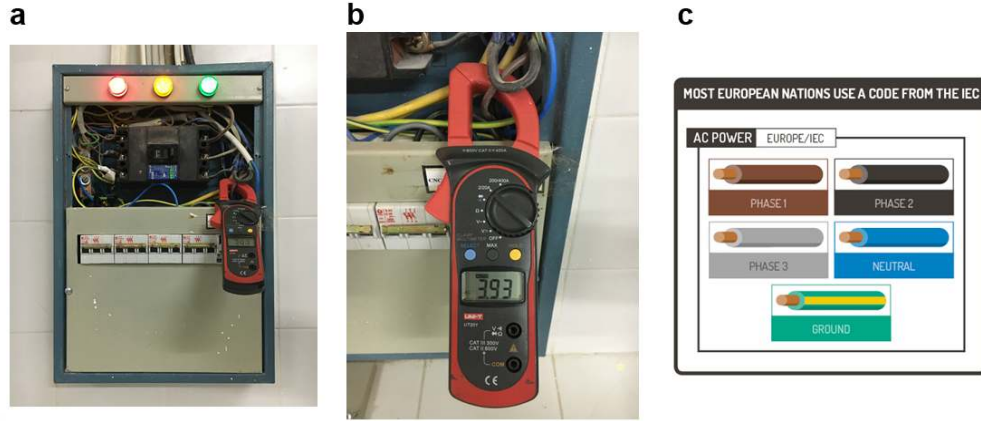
Setup for current measurement used in this work; a) Electric panel of CNC lathe, b) Digital Clamp Multimeter, c) Cable color of electrical phases.
